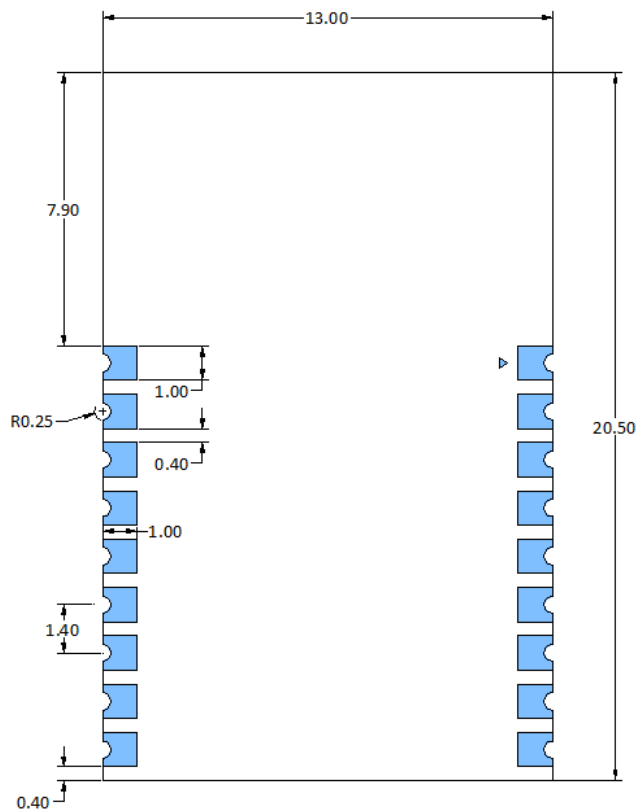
Mechanical Drawing (BOTTOM VIEW)
